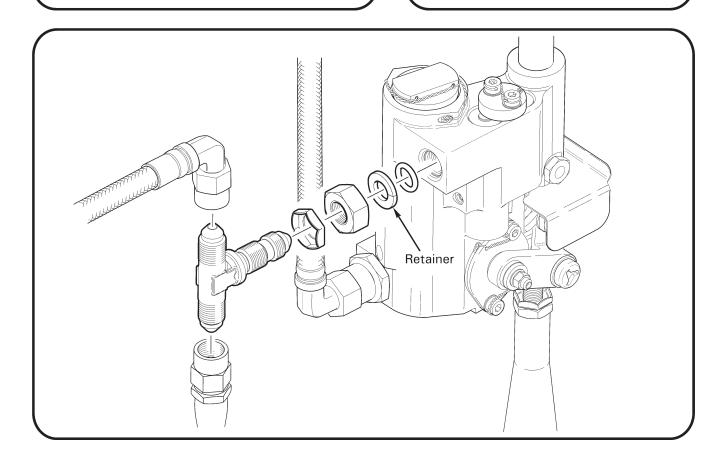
HYDRAULIC FITTING O-RING RETAINERS
